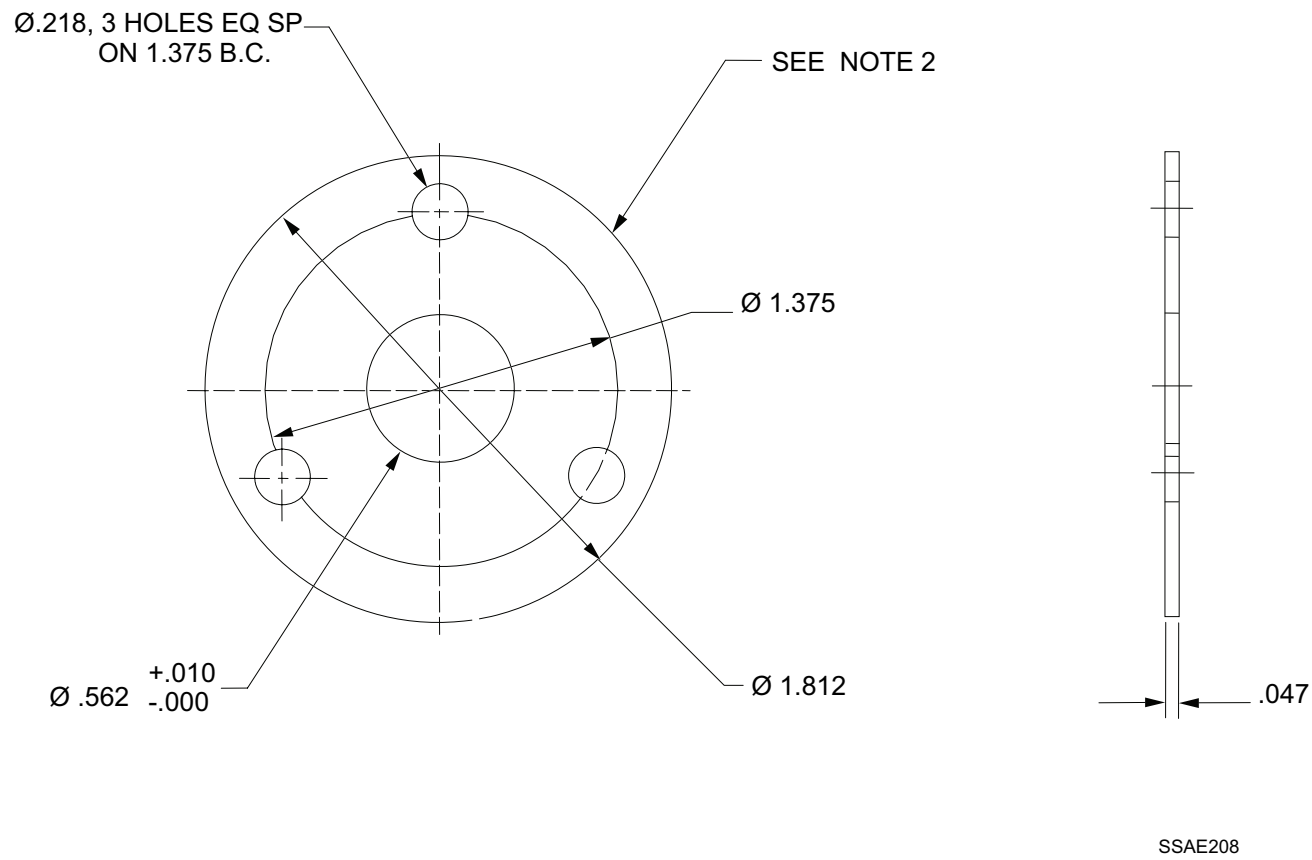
Air Feed-Thru Connector Assembly, PN 20087058 (Sheet 2 of 2).
